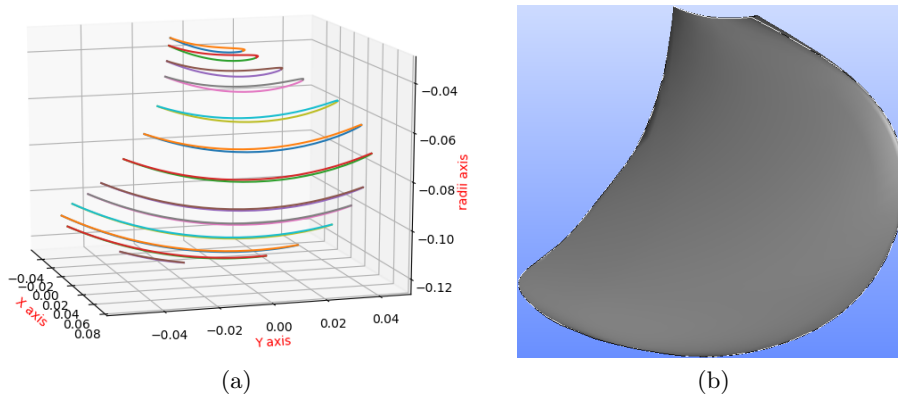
PPTC blade bottom-up construction with BladeX: (a) Cylindrical blade sections in their final three dimensional position. (b) The generated CAD surface (saved in *iges* file format).
